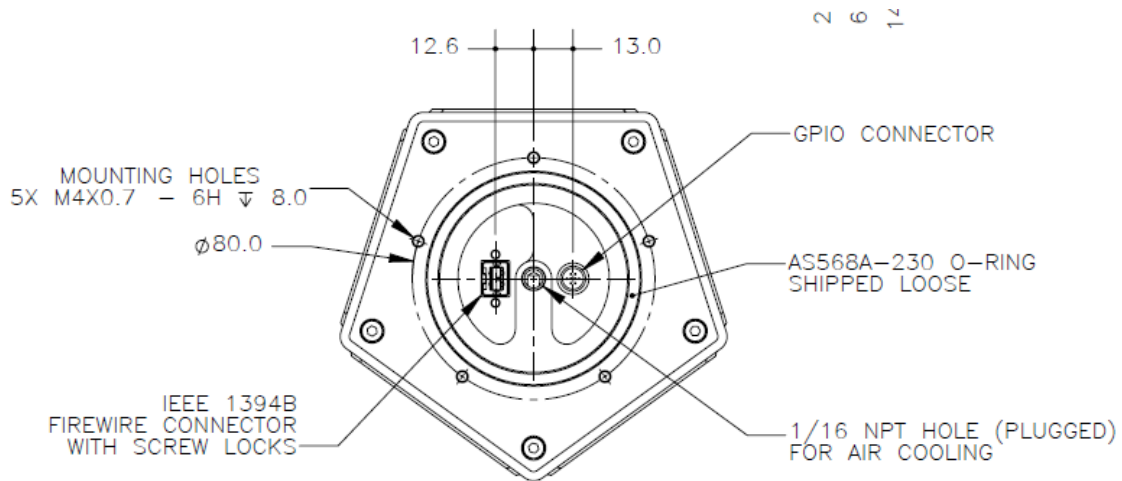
Camera dimensional drawing, bottom view (measurements in mm)
